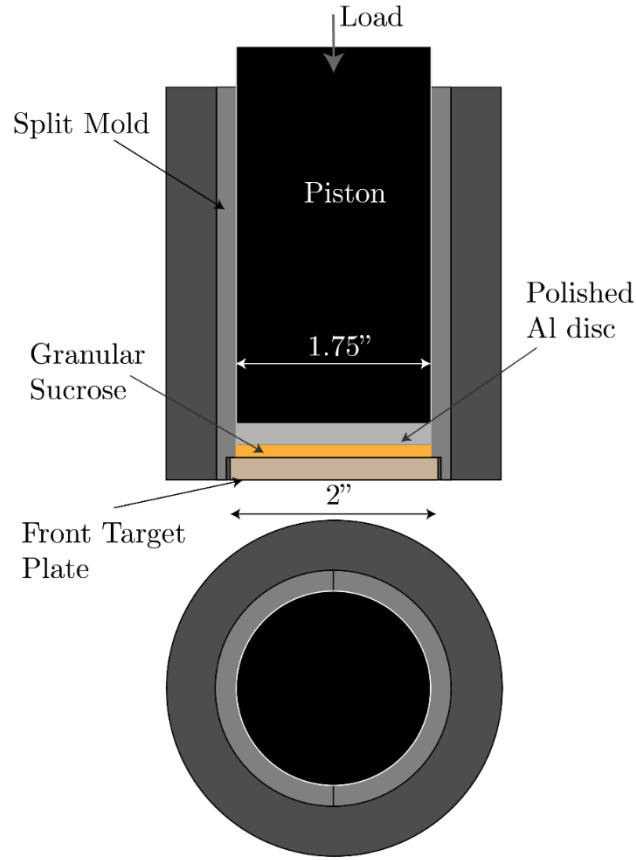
Split- Mold fixture to prepare granular sucrose sample. Top: section view. Bottom: top view
